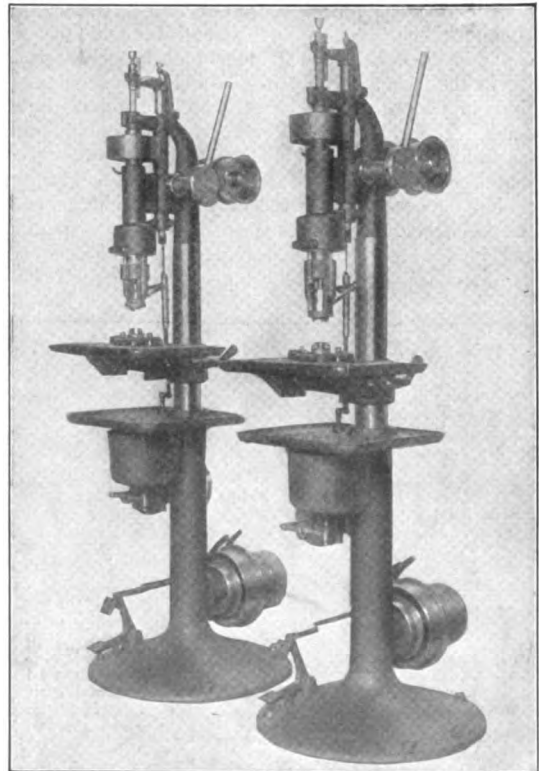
SPECIALLY EQUIPPED DRILLING MACHINE FOR BOTTOM PLUG AND CHAMBER SLEEVE
